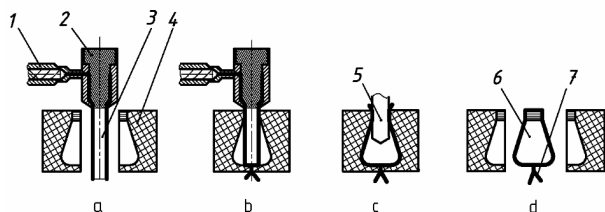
Preparation of an extrusion blow-molded article by a single-stage blow molding method: a – extrusion of the billet; b – closing of the press-form; c – blowing of the polymer billet; d – unloading the finished product; 1 – extruder; 2 – molding die; 3 – polymer billet; 4 – the press-form; 5 – pneumatic blowing system of polymer billet; 6 – finished product; 7 – technological flash
